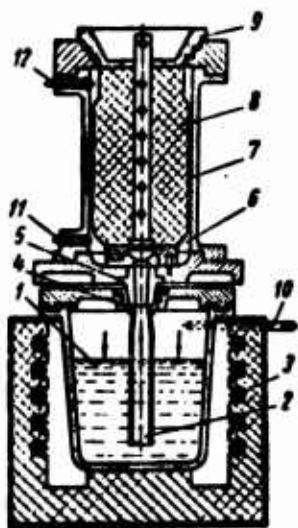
Diagram of installation for casting under low pressure: 1 - crucible; 2 - metal conduit; 3 - electric heaters; 4 - head of metal conduit; 5 - flow gate sleeve; 6 - collector; 7 - die; 8 - core; 9 - filter; 10 - pipe for supply of gas; 11, 12 - contacts.
